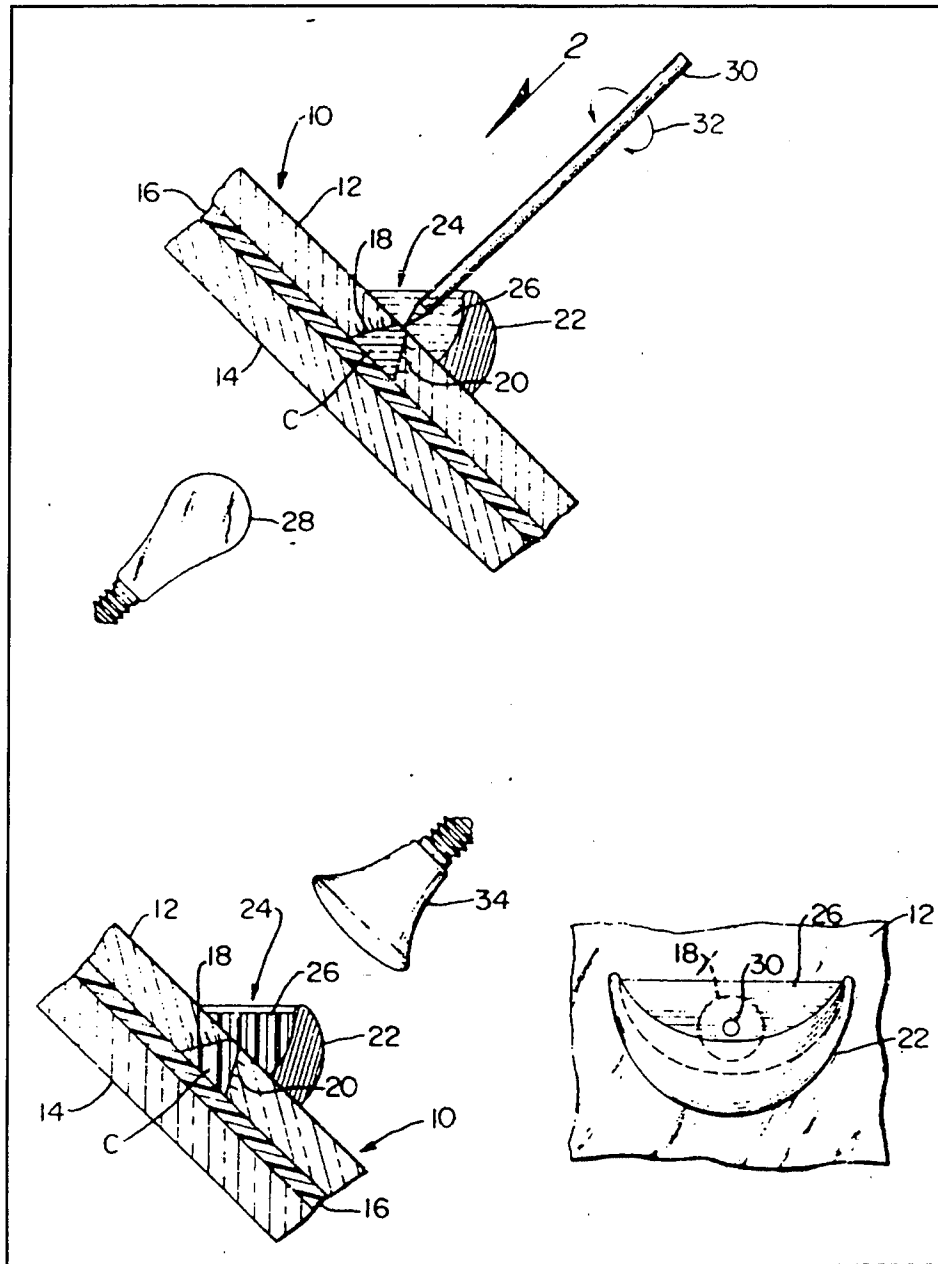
C/KC-135 #4 W/WS Cross-Section
